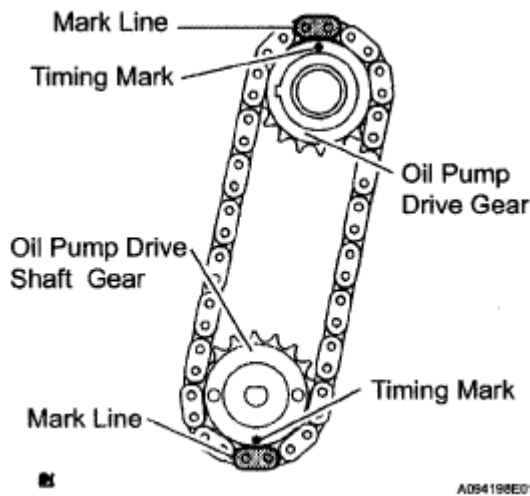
Identifying Oil Pump Drive Shaft Gear, Timing Gear And Mark Line
